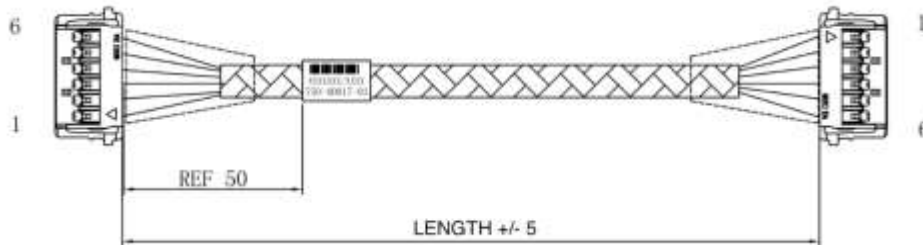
6-pin Cable Drawing (for Master and Shared port connections)
